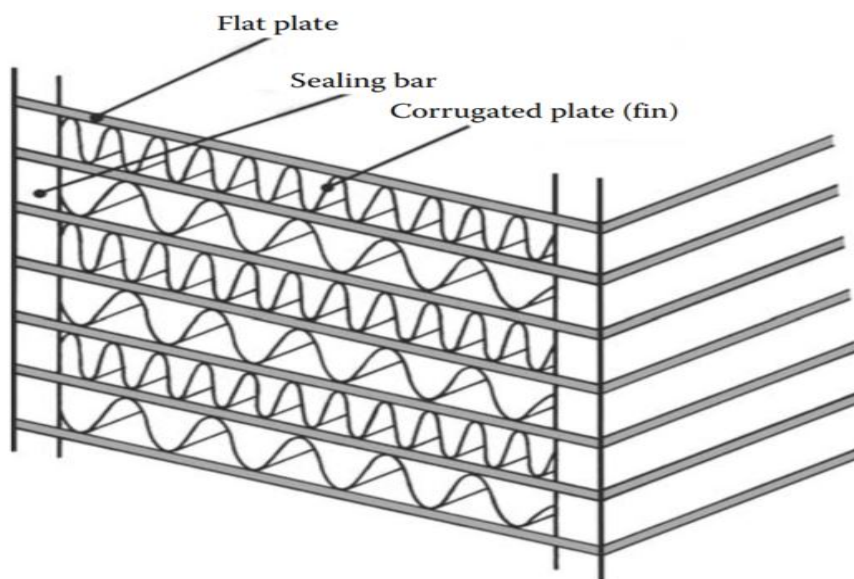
Extended surface (Plate fin) type heat exchanger [6]
